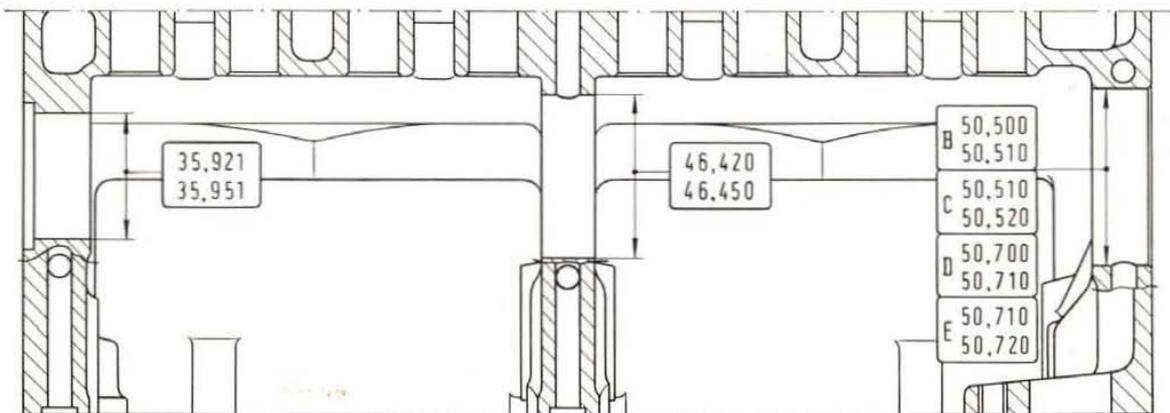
Critical dimensions (metric) of camshaft bushing seats.
